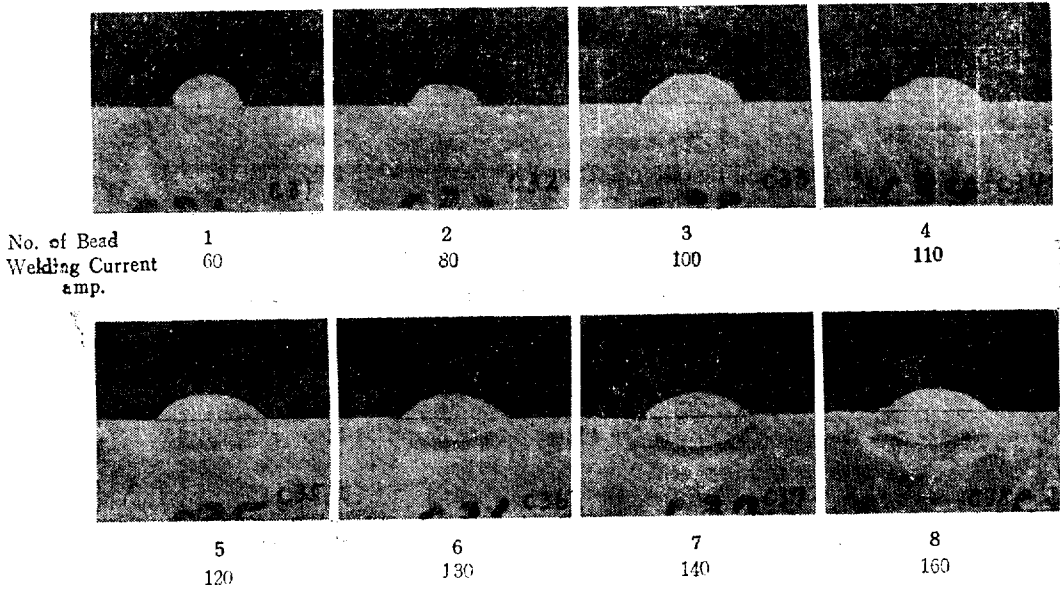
Macro pictures showing different penetrations by different welding currents (2×).
